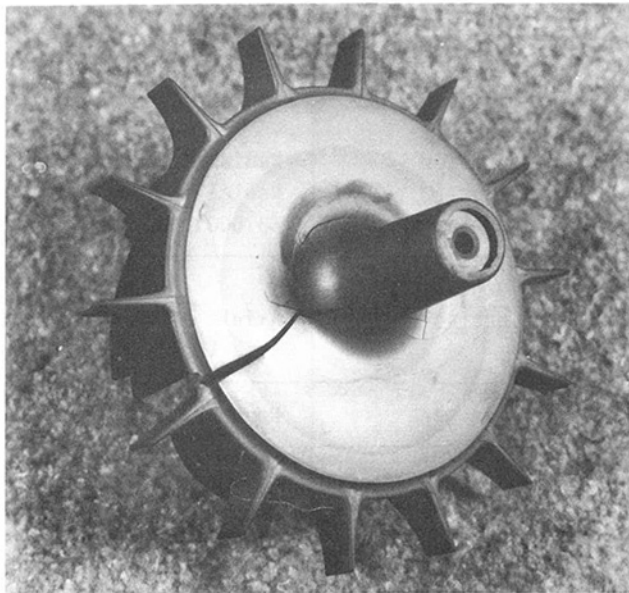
Cracked Si_3N_4 radial wheel fabricated by one body forming
